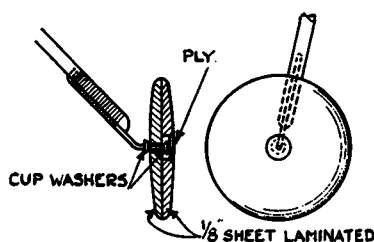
A method of making wheels with a blind axle to give a smooth and streamlined exterior.
